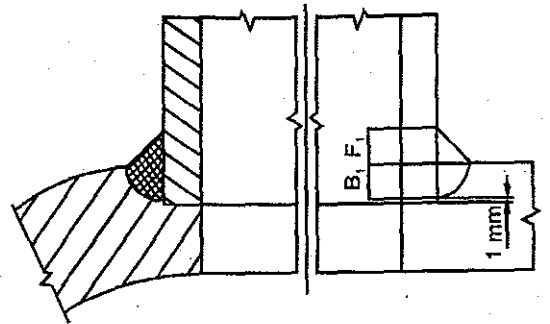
C — UNREINFORCED BRANCHES INACCESSIBLE FOR WELDING INSIDE SHELL
